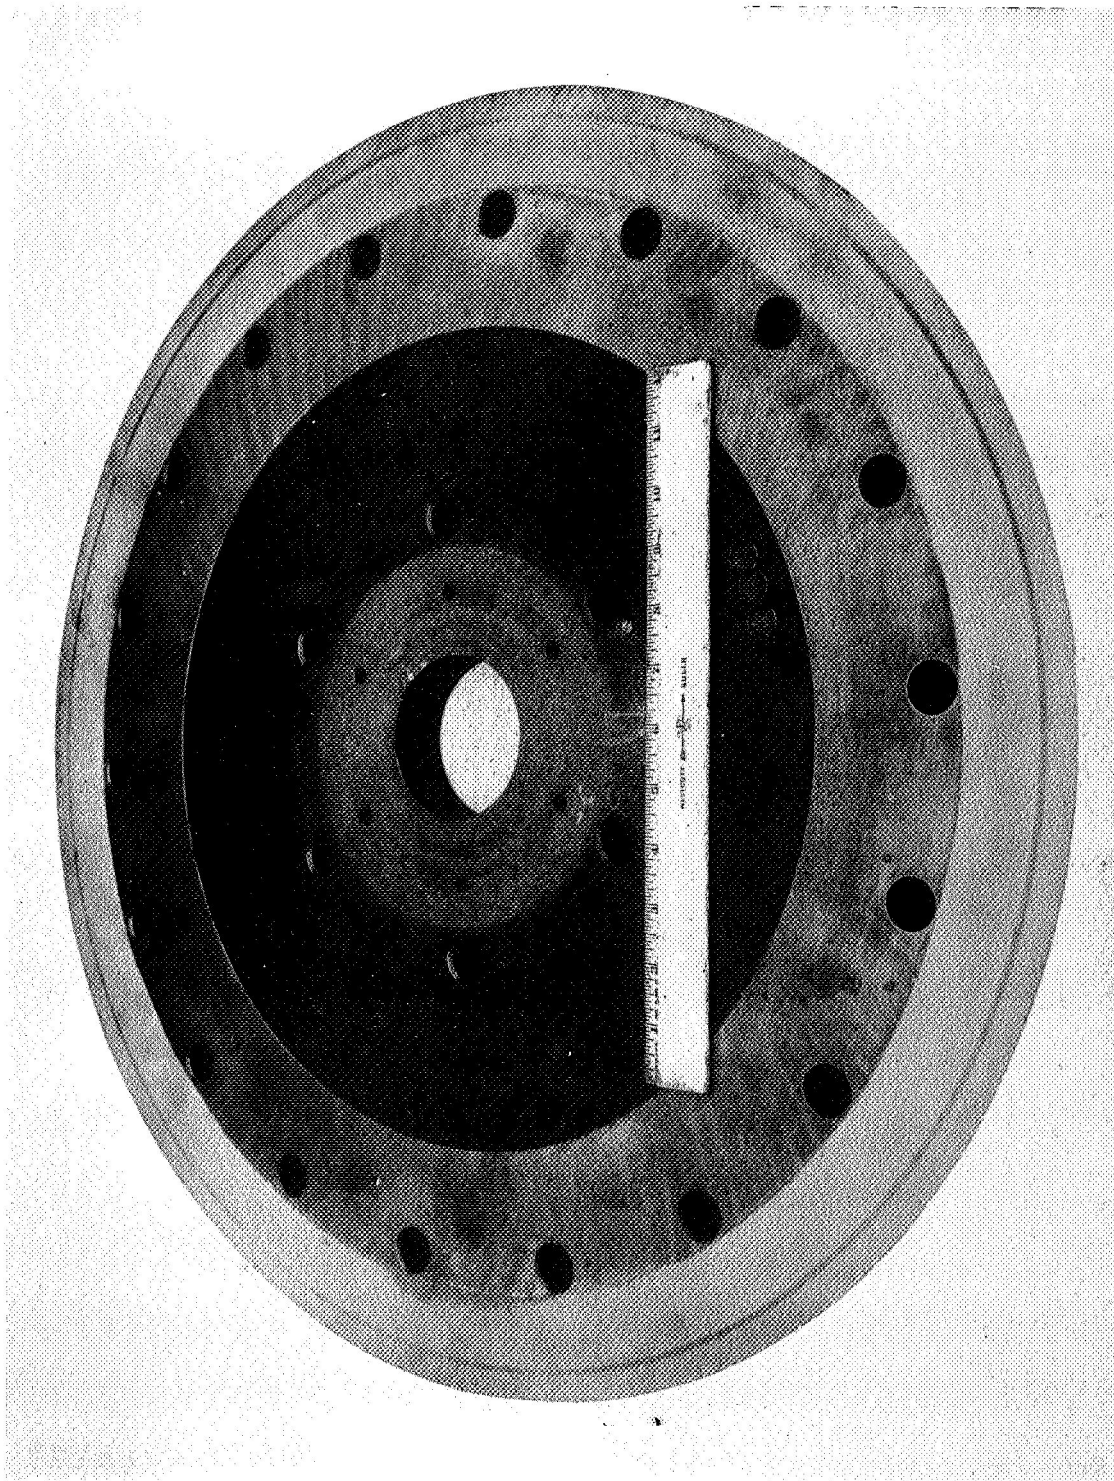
4140 Disk, Bottom, with Flame-Sprayed Plating
